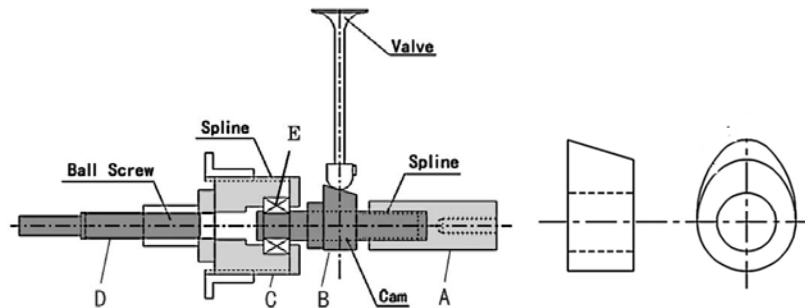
Three-dimensional cam mechanism with ball follower [22]
